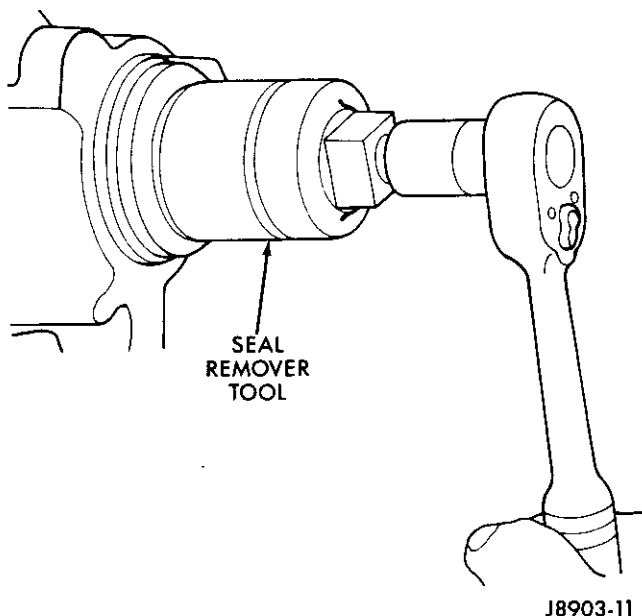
Drive Pinion Gear Shaft Seal Removal
